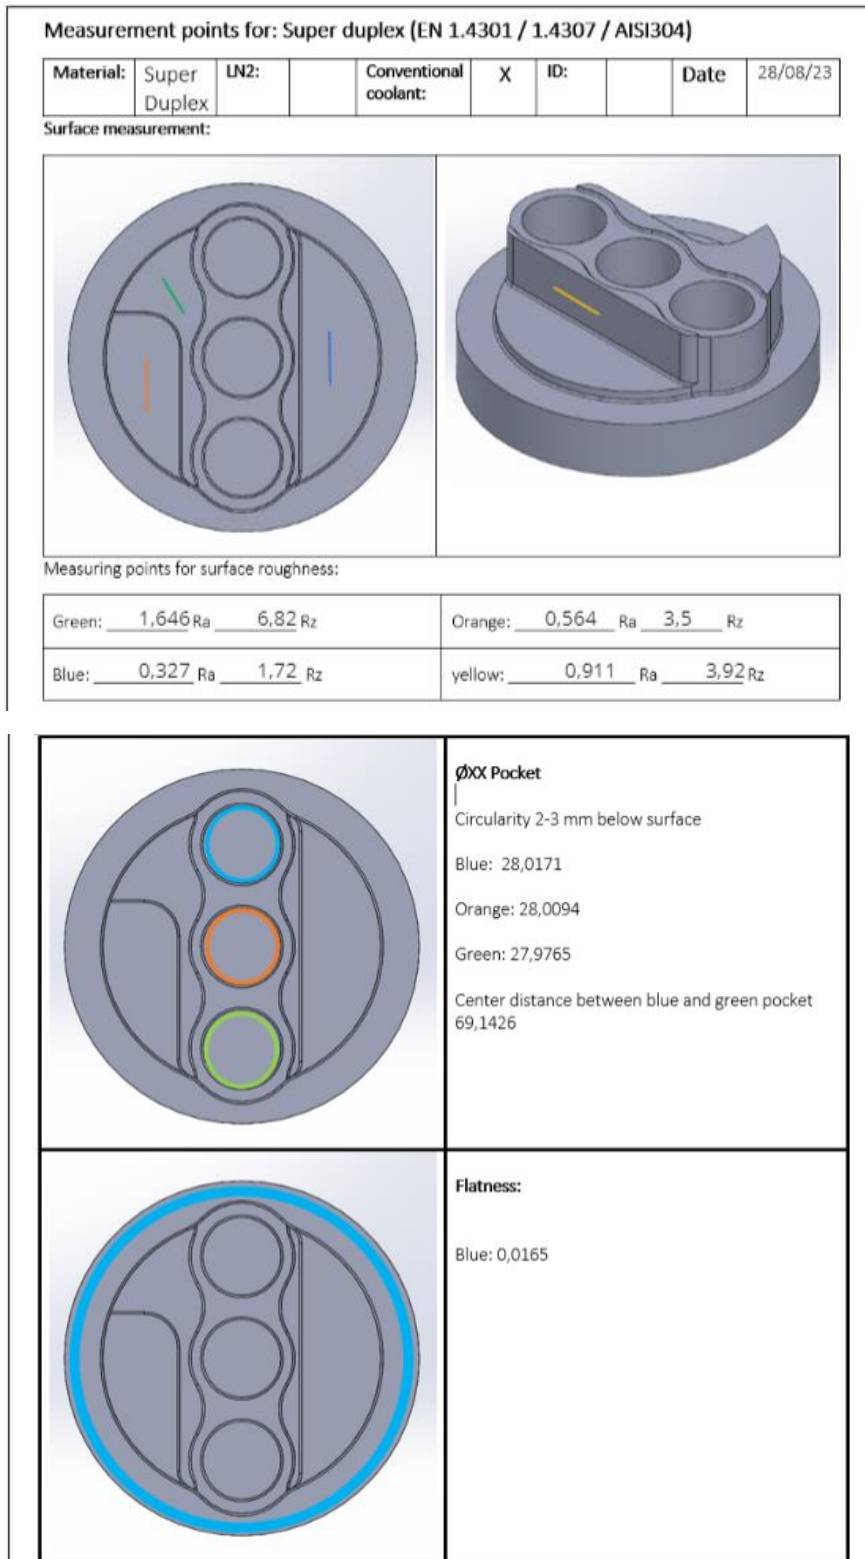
Geometrical and Dimensional Tolerance measurement – Data sheet Super Duplex-A-LN2.
